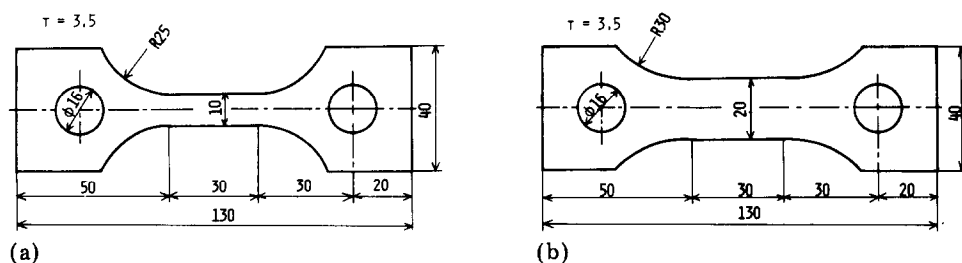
Shape and dimensions of test specimens for (a) tester A and (b) tester B (all dimensions in millimeters).
